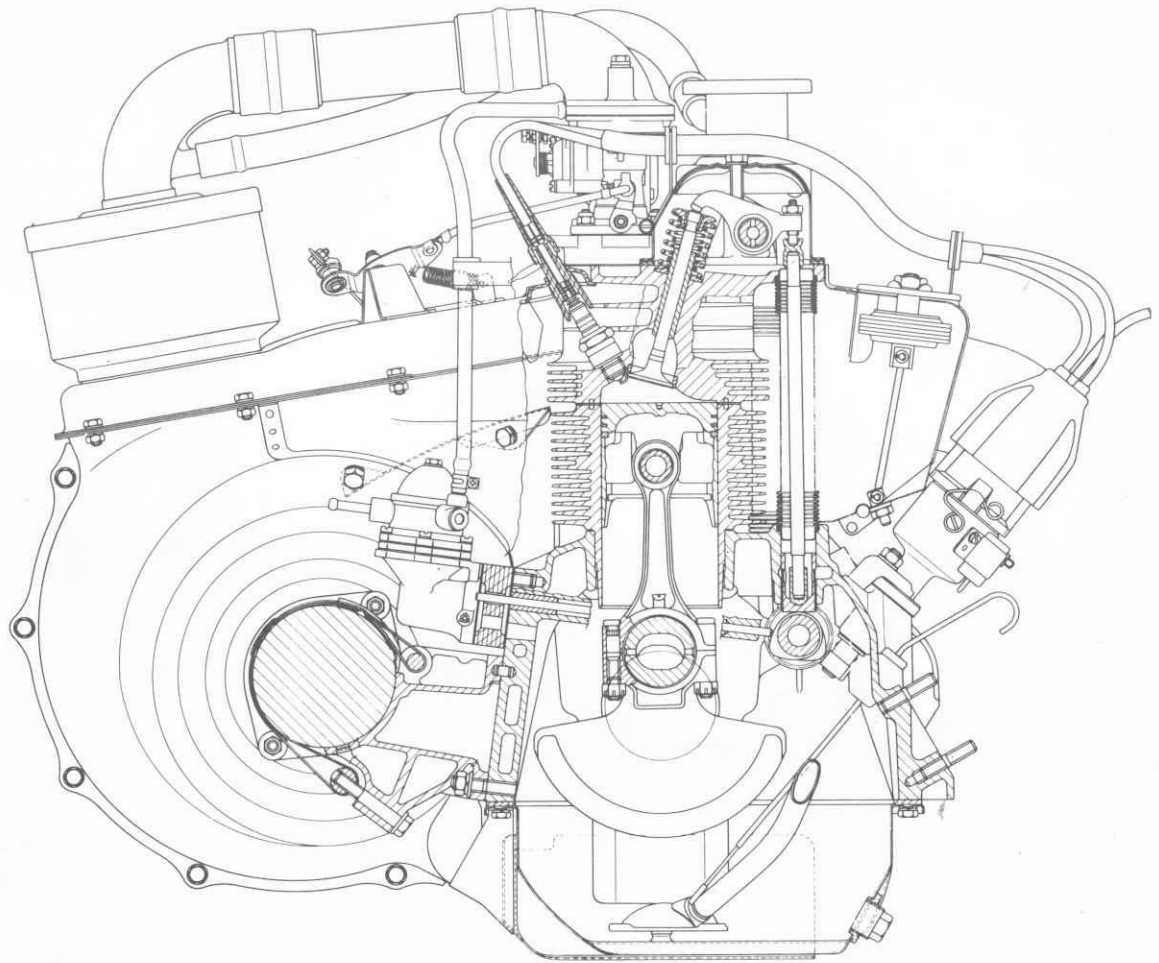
3 Cross-section through the engine showing the generator and fan housing on the left. Note the pushrod-driven fuel pump also on the left and the distributor on the right
